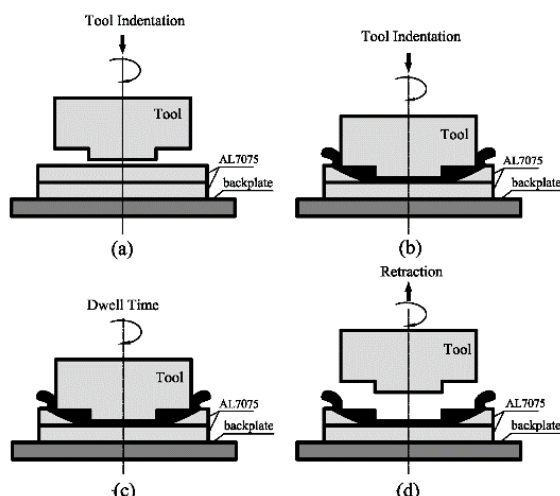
Schematic of friction stir spot welding process [7]
